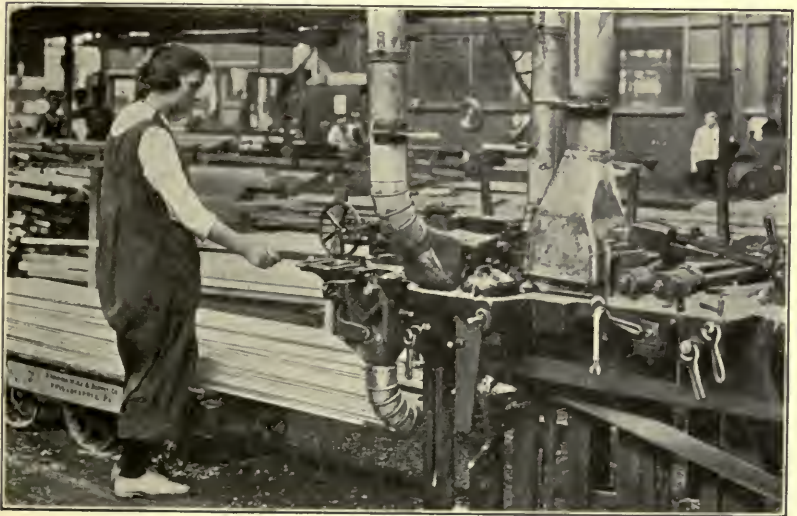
GIRL OPERATING MOLDING MACHINE.
